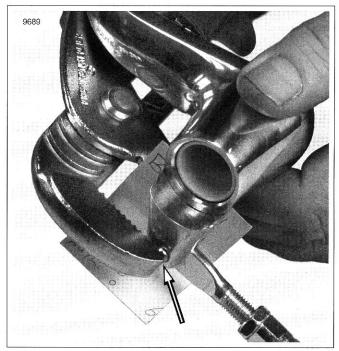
Releasing Clevis Pin (brake pedal removed from motorcycle for clarity)
